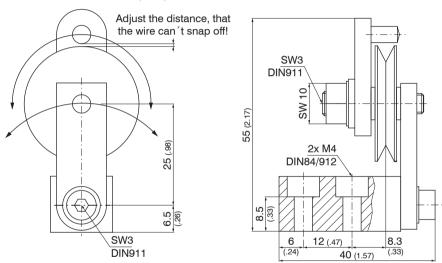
Guide pulley TR1-WPS with mounting socket, dimensions in mm (inches), not to scale
